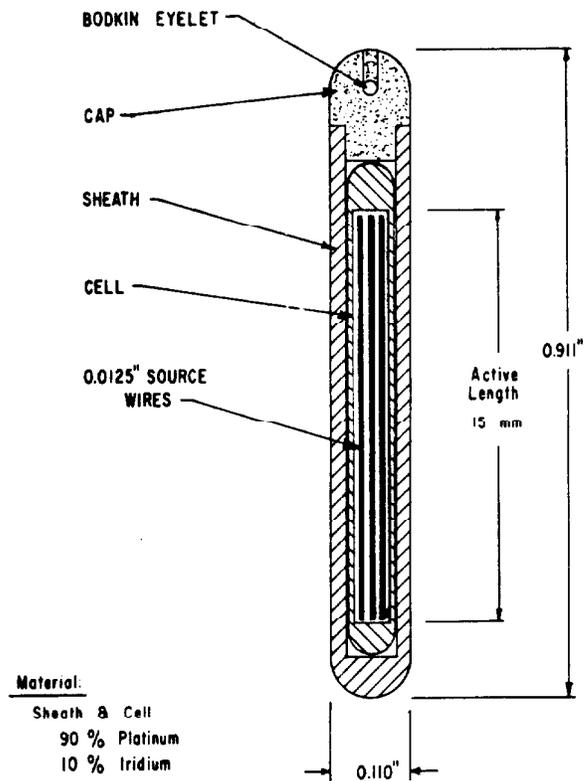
^{252}Cf APPLICATOR TUBE ASSEMBLY
